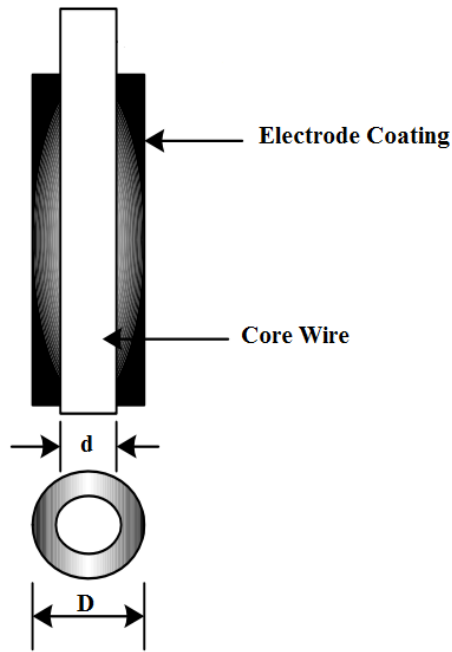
Schematic diagram of coated welding electrode.
